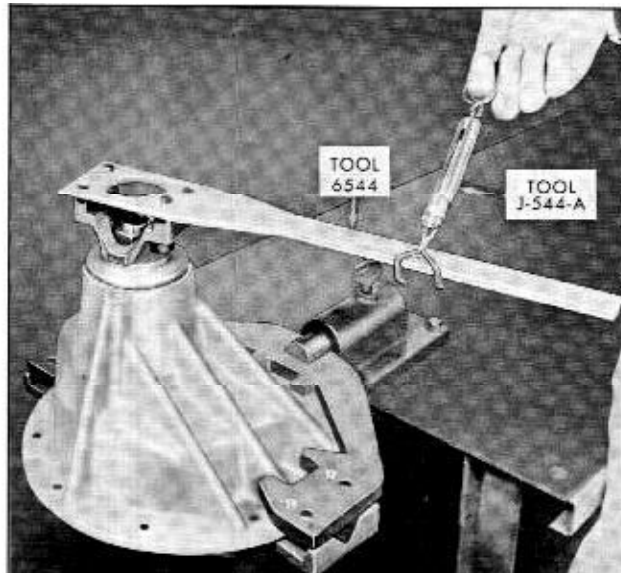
Measuring Bearing Preload With Spring Scale
